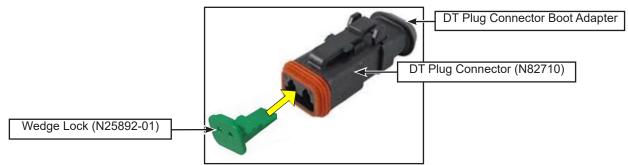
Wedge Lock Insertion into Deutsch DT Plug Connector
